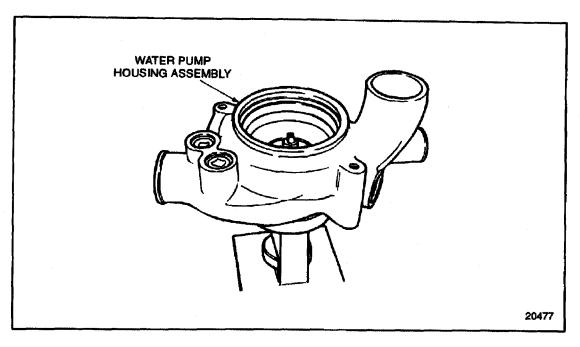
Water Pump Impeller Installation Set-up (GCM)
